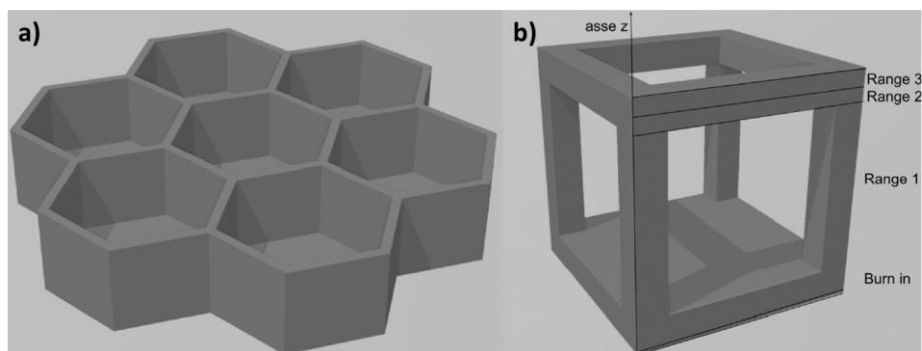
CAD project of a) honeycomb and b) perforated cube.
